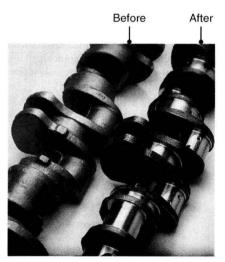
A forged crankshaft before and after machining the bearing surfaces. The shiny bearing surfaces of the part on the right cannot be made to their final dimensions and surface finish by any of the processes described in previous chapters of this book. *Source*: Courtesy of Wyman-Gordon Company.
